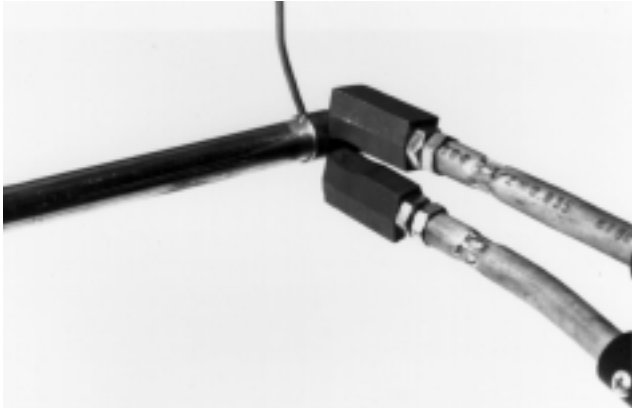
Soldering with Carbon Tips Contacting Fitting
